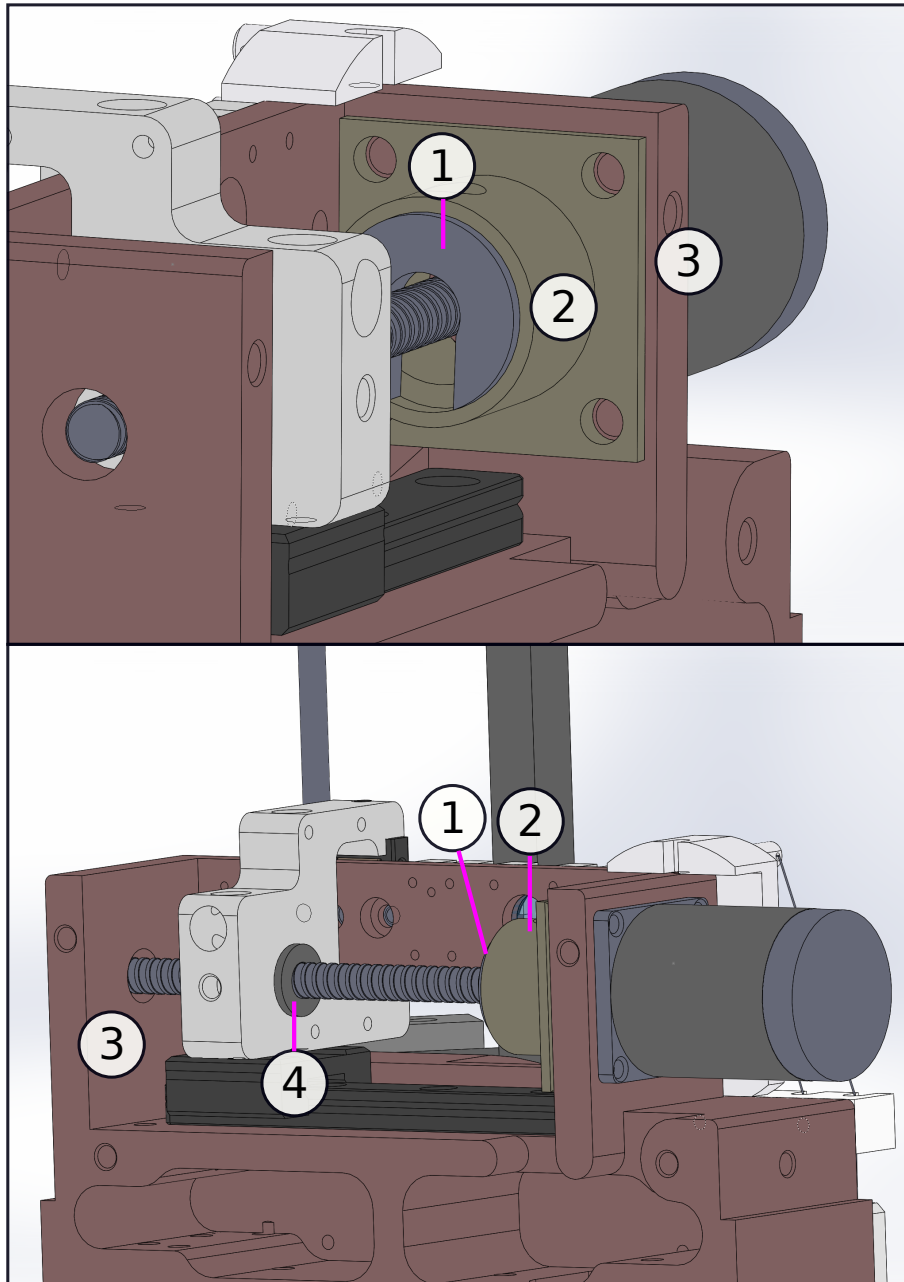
Transport Mechanism of Magnetic Trap. A cryogenic motor (1) rotates a ball screw made of stainless steel (2). The magnet holder (3) contains a spindle nut and is placed on a sled on a rail guide (4). The cryogenic motor rotates the ball screw which moves the magnet holder on the rail guide allowing a translation of the magnetic trap from the stopping wires for the neutral molecules (5) to the ion trap (6) and back.
